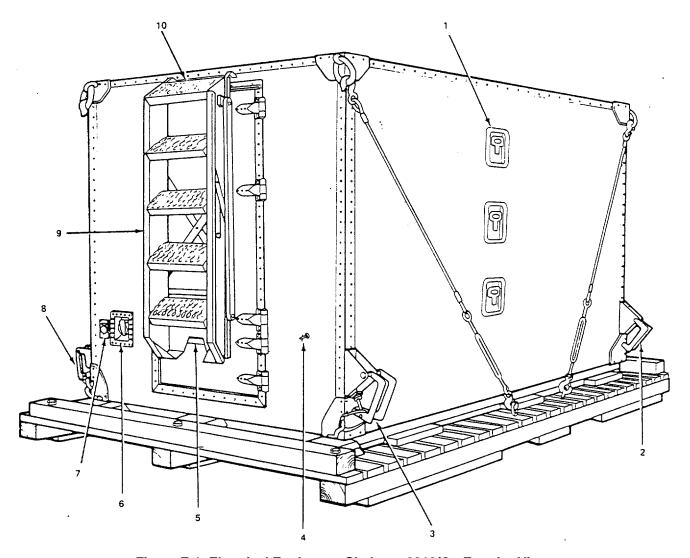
Electrical Equipment Shelter s-2810/G - Exterior View
